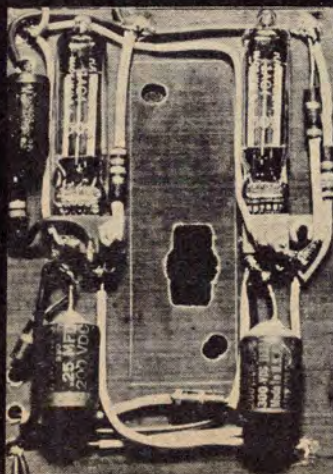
TOP VIEW OF TUBE CHASSIS -
